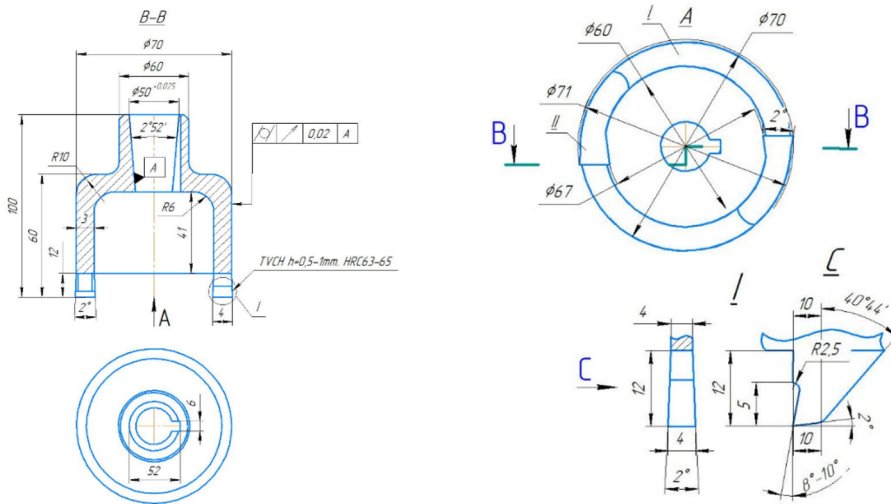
The drawing shows an improved core cutting tool made from HSS material.
